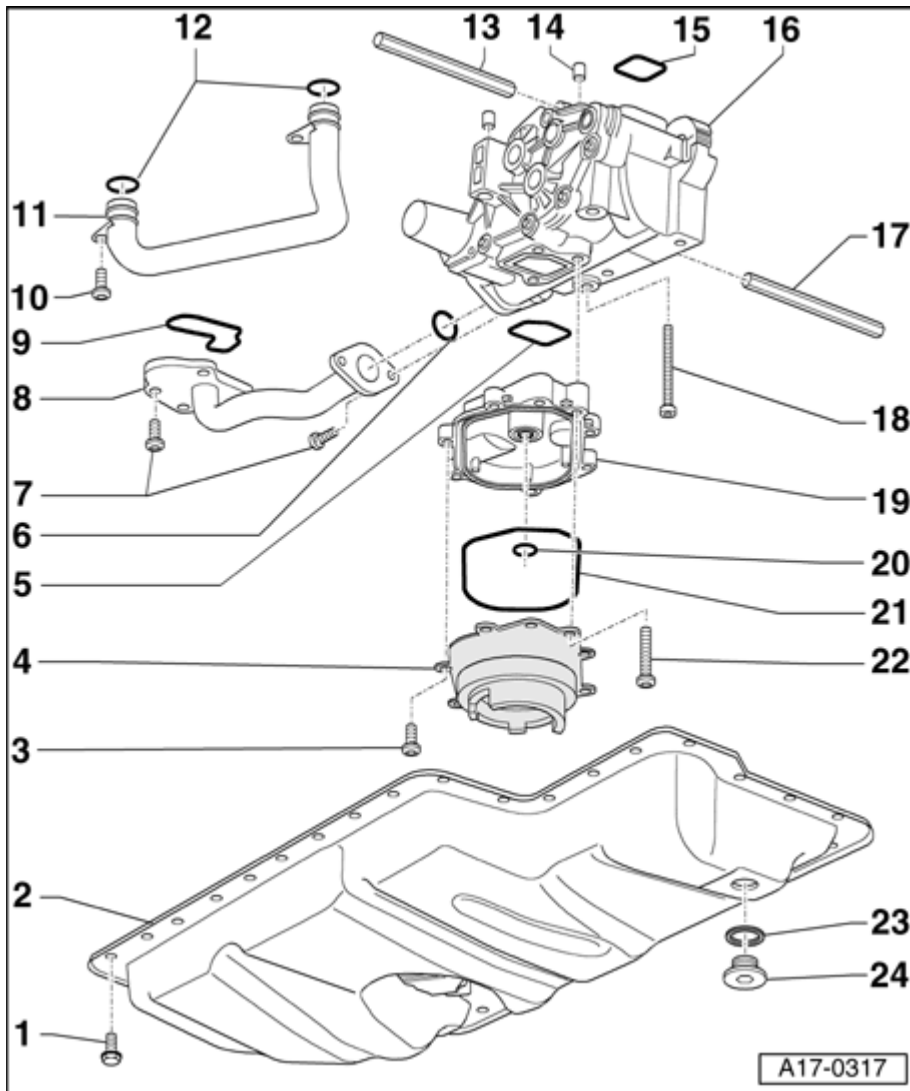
Oil Pump, Lower Section Of Oil Pan, Component Overview
